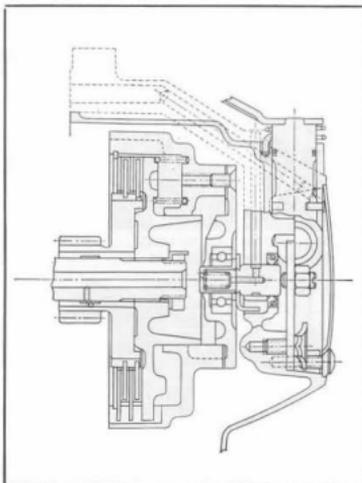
CT 70 H, HK1 Clutch assembly
